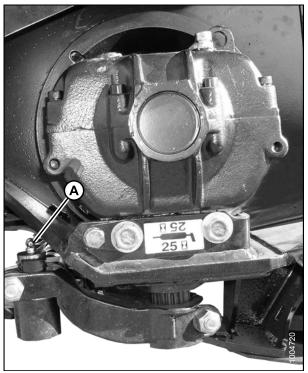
Knifehead (Single Knife – 1 Place) (Double Knife – 2 Places)
